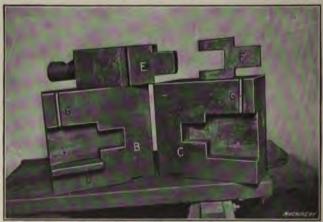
Dies and Tools for making Spring Hangers in a 6-inch Ajax Universal Forging Machine
